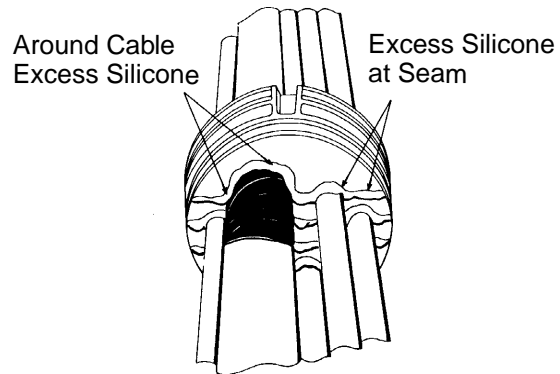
COMPLETED APPLICATION OF CABLES
